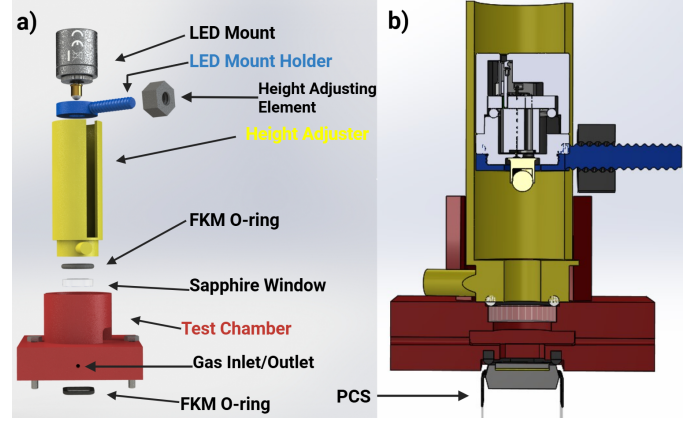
a) Exploded view test chamber b) Cross-section test chamber
